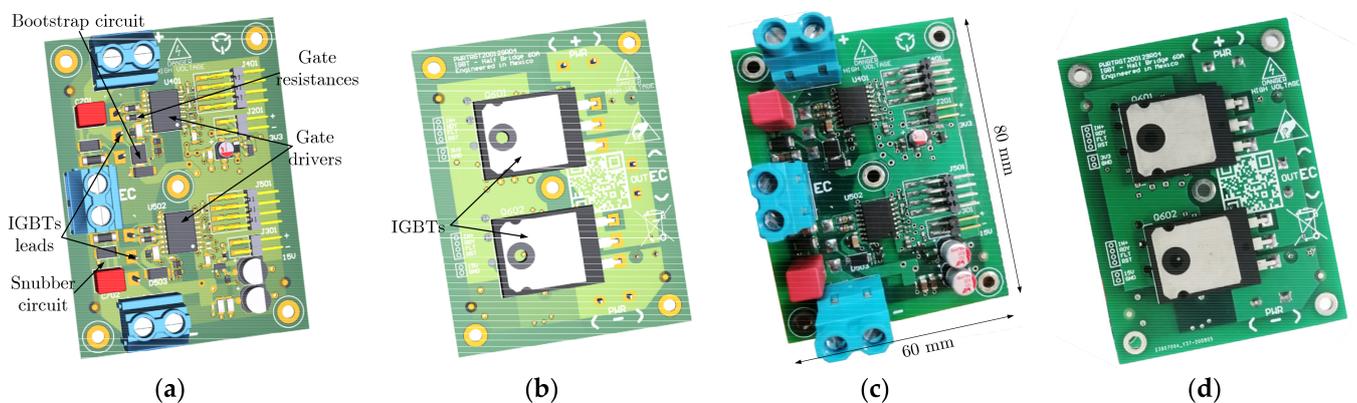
Developed HB cell: (a) 3D model, top view; (b) 3D model, bottom view; (c) implemented prototype, top view; (d) implemented prototype, bottom view.
